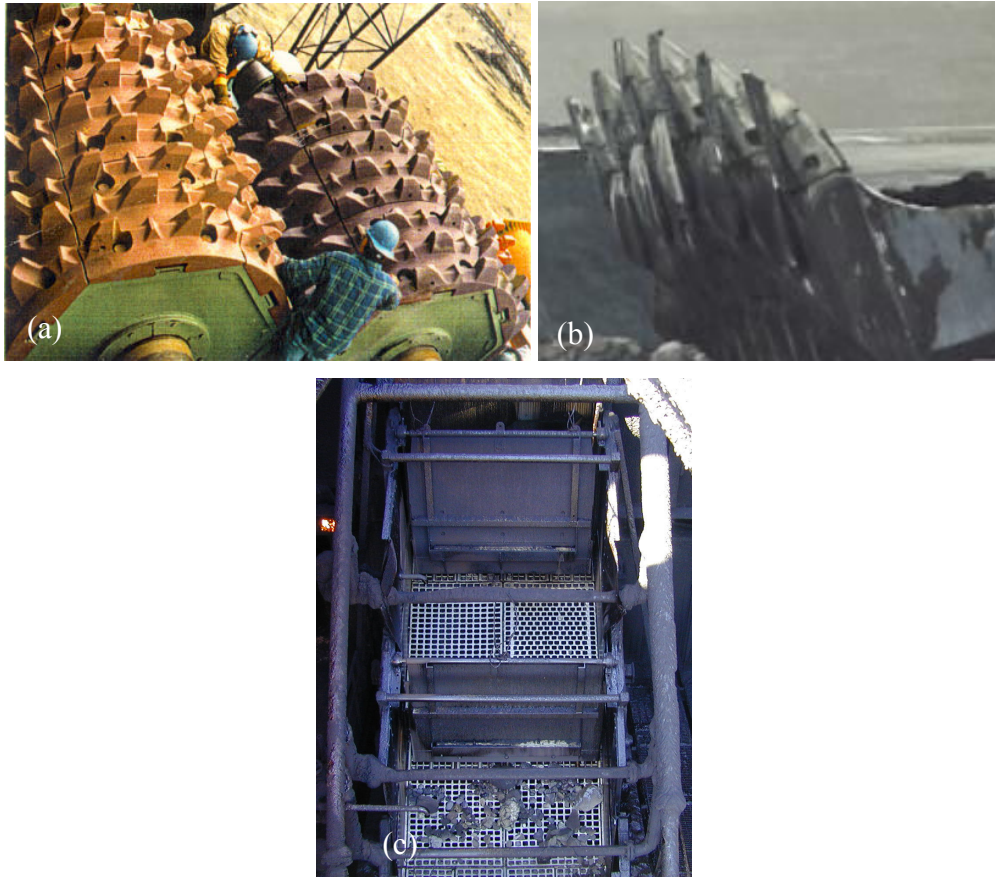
Examples of oil sands mining components that require tungsten carbide based wear resistant coatings – (a) the crusher teeth on a rotating digging wheel, (b) the shovel teeth on the end of a bucket and (c) cyclofeeder sieves, courtesy of Syncrude Canada, Inc.
